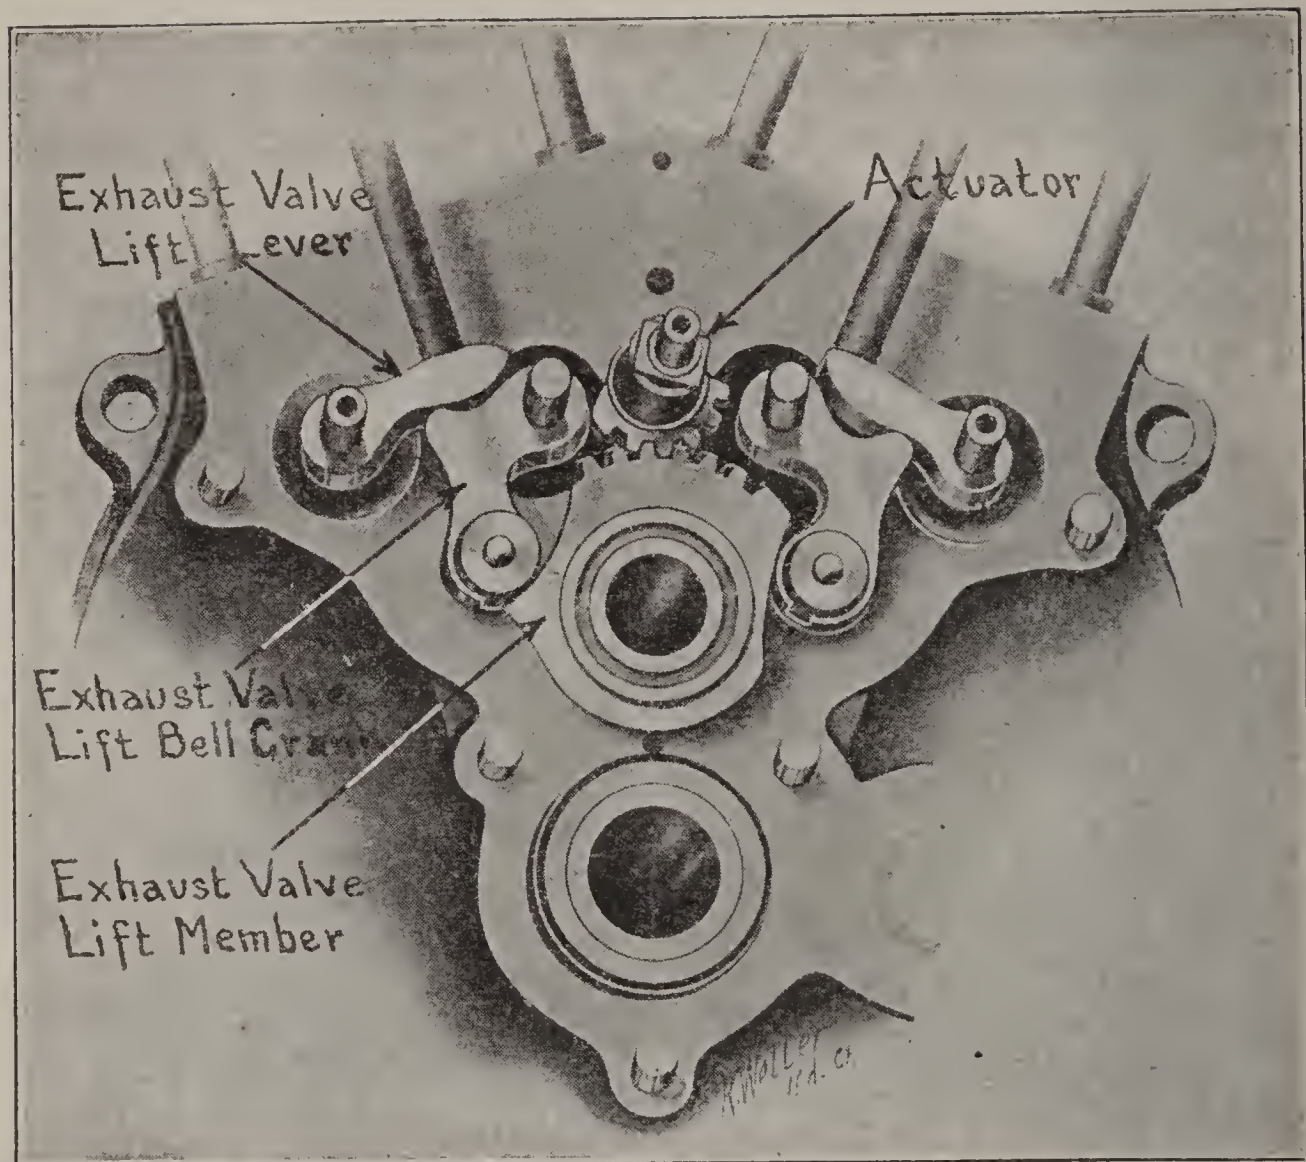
Method of Raising Exhaust Valves to Relieve Compression in Cylinders Employed on Indian Twin Motors.
